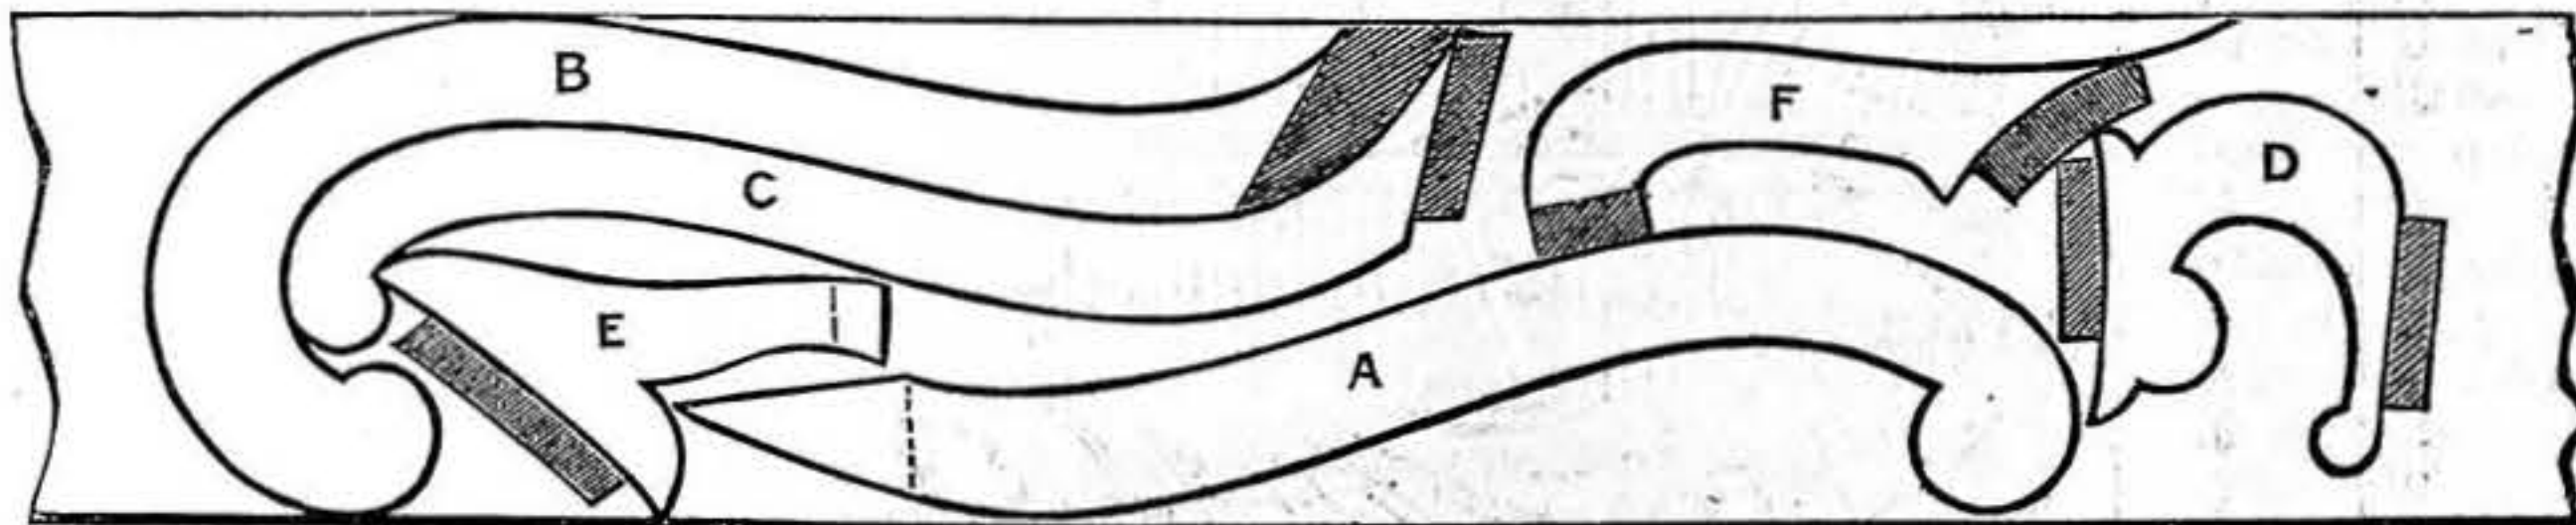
Method of cutting out the Various Parts from one Piece of Board.
